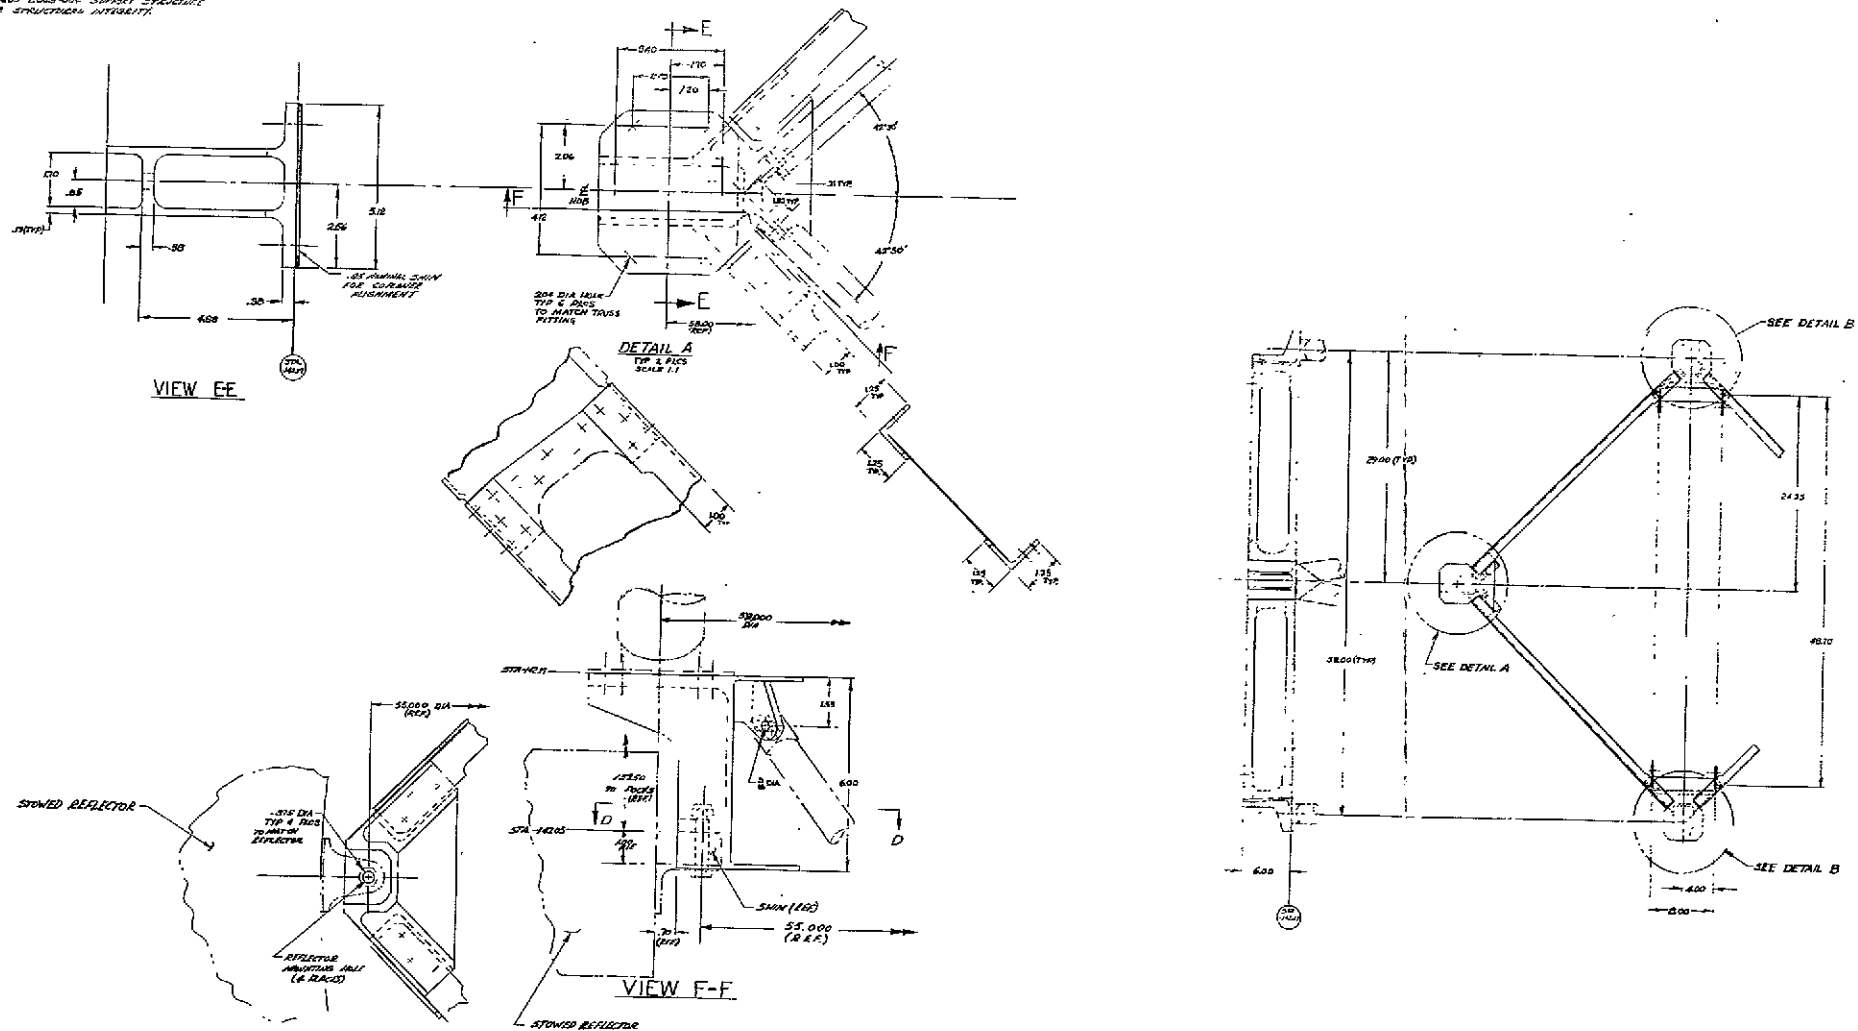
Hub Assembly (Sheet 1 of 2)
